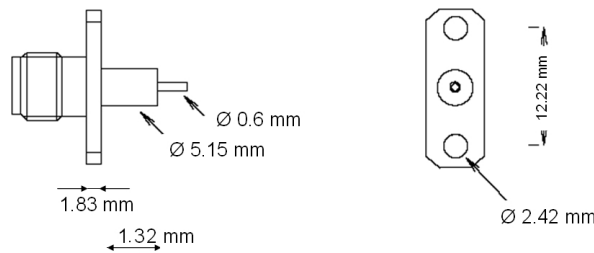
2.4 mm Bulkhead Connector Assembly.
